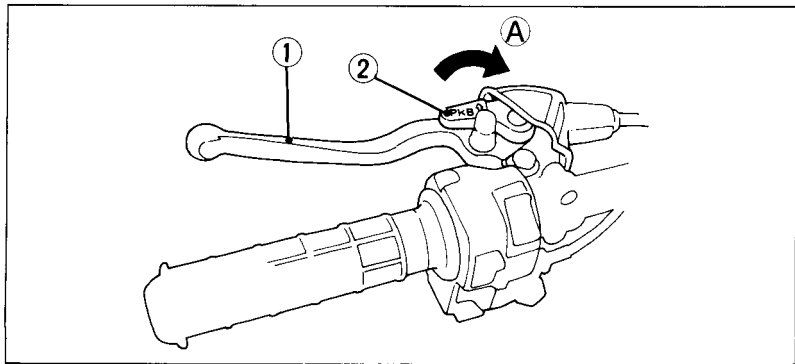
(1) Rear brake lever/Parking brake (2) Lock lever (A) To lock
